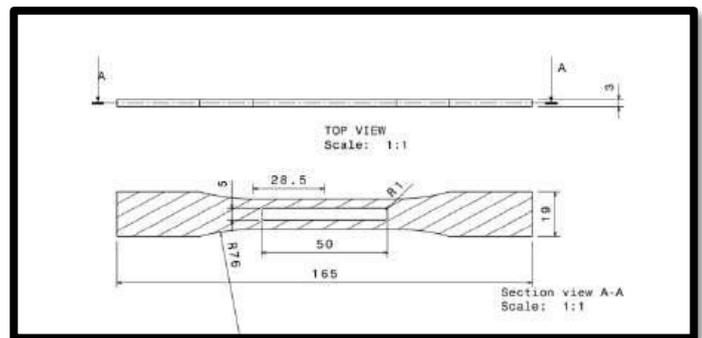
Specimen 2D Drawing (Top View and Its Section View), dimensions in mm
